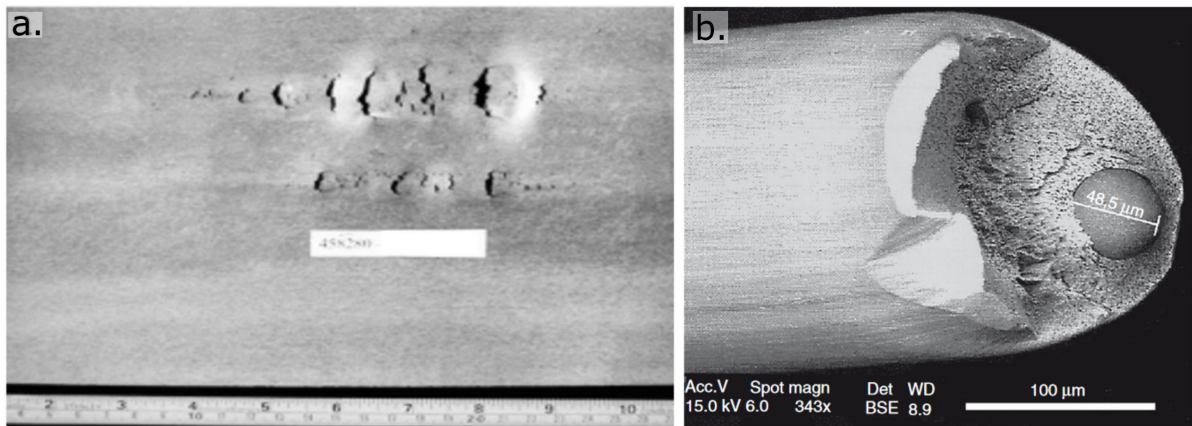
Examples of damage caused by non-metallic inclusions during steel processing. a) surface defects in rolled products, reproduced from [57] with permission of Elsevier Science & Technology Journals; b) wire fracture caused by an inclusion during drawing [73] (Reprinted with permission of ASM International. All rights reserved. www.asminternational.org).
